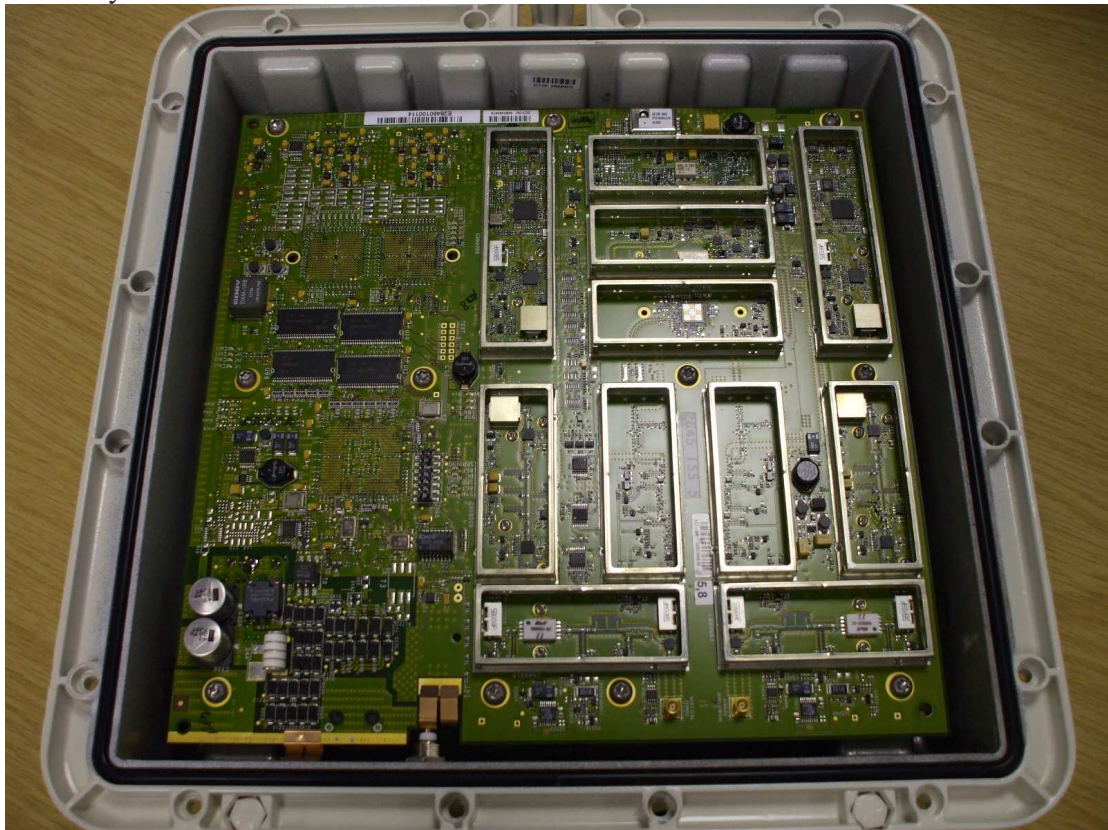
PTP5xx00 with cover plate and screening cans removed to show internal assembly
